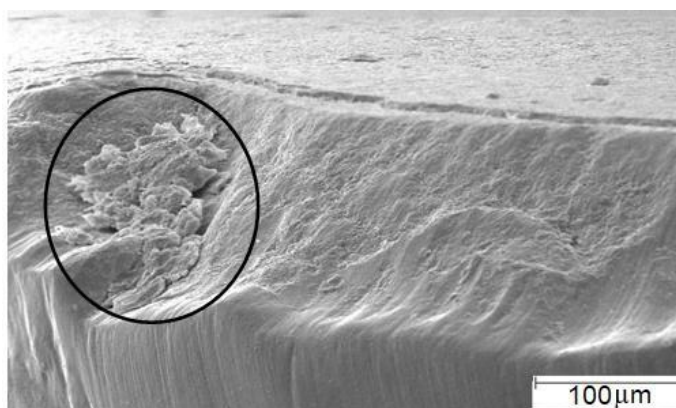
The material of the workpiece that adheres and remains on the chipping area of cutting tool ($t=1.600$ m). Cutting conditions: $V_c = 95$ m/min; $f_z = 0.04$ mm/rev
